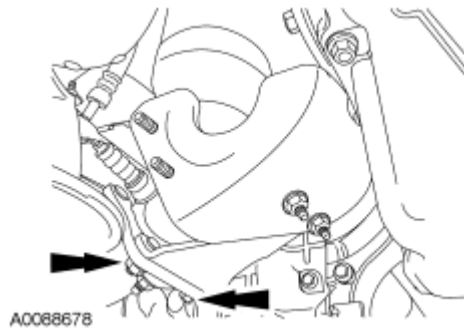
Locating Bolts On Rear Of Exhaust-To-Intermediate Shaft Bracket
